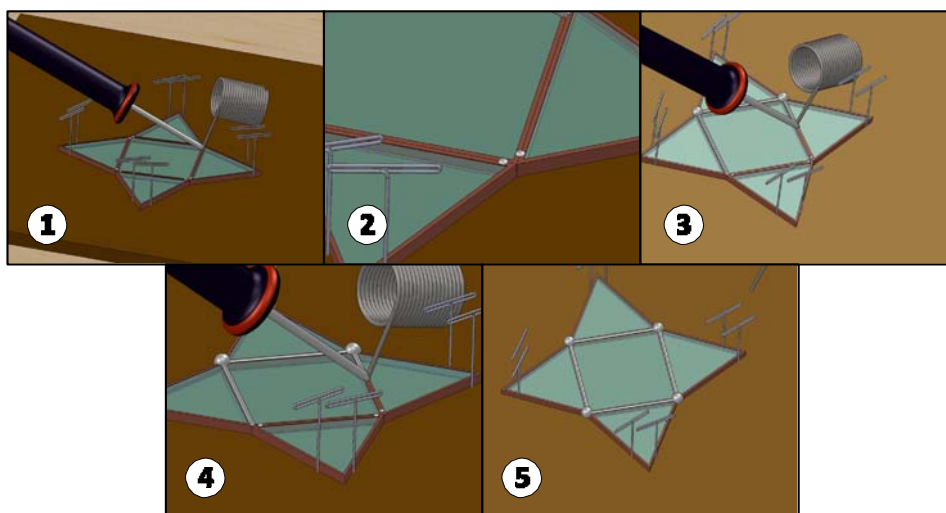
Tacking and soldering- (1) Warm a corner and apply a small tack of solder. (2) Tack all seams on each end of the seam. (3) After all tacks are made, start soldering the entire seam. (4) Make sure to apply heat to the foil before applying solder. (5) All four seams soldered on the first side.
